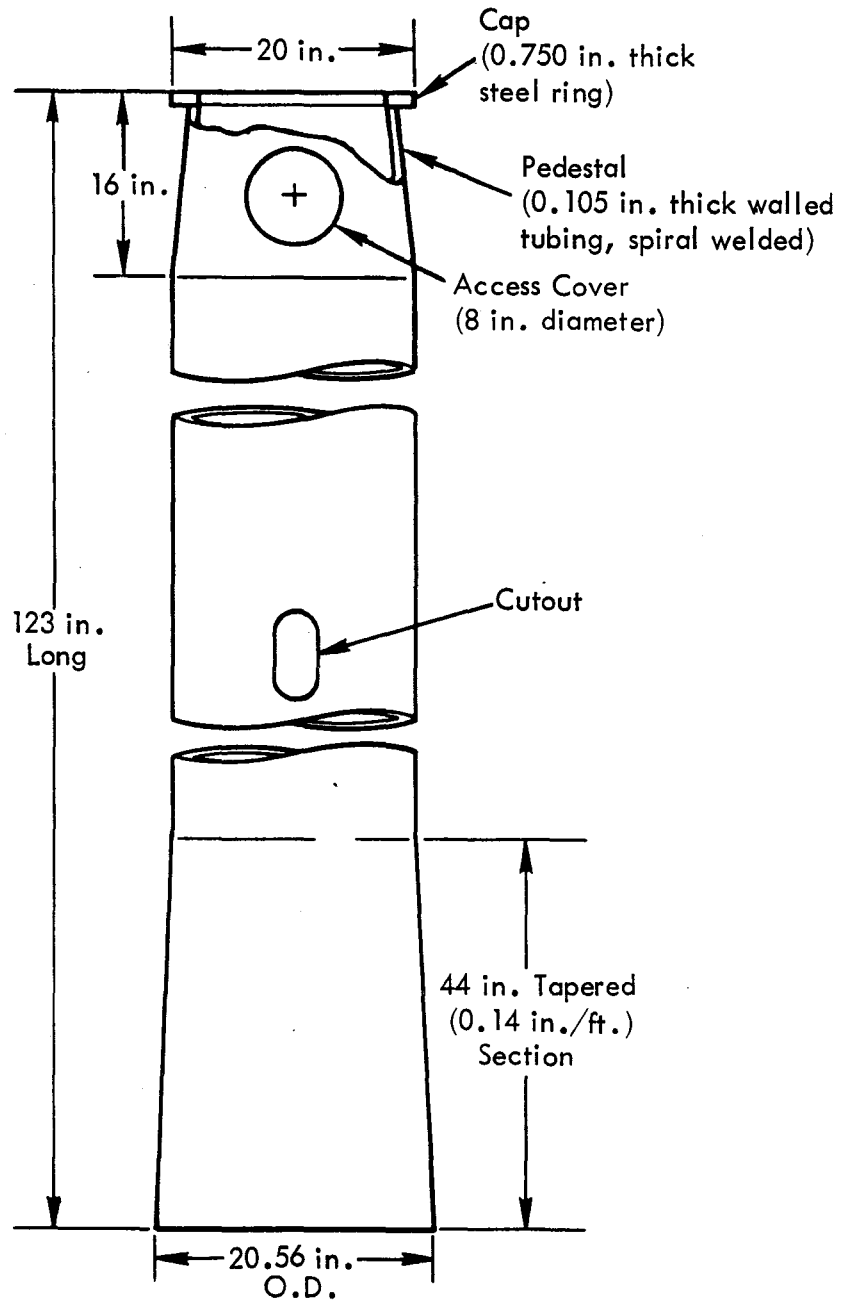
PEDESTAL ASSEMBLY(1D22461-1)
